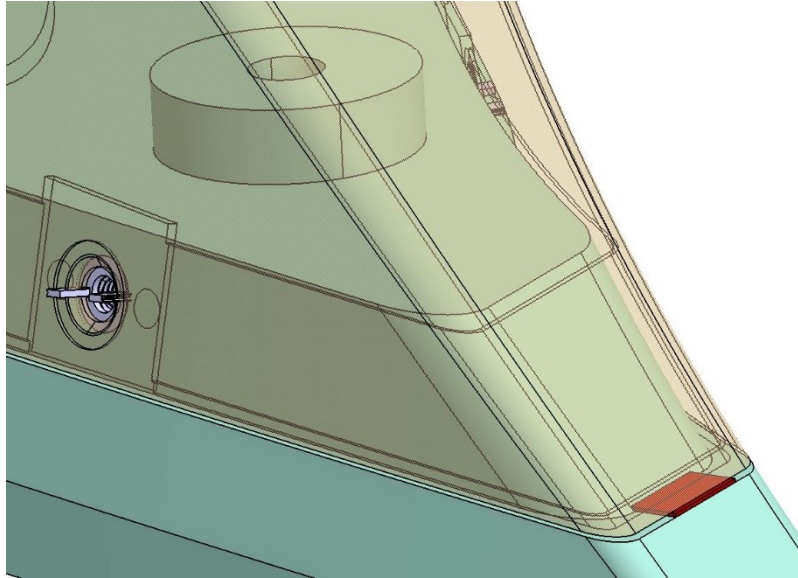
Detail view of pad, floating Keensert, and datum used
